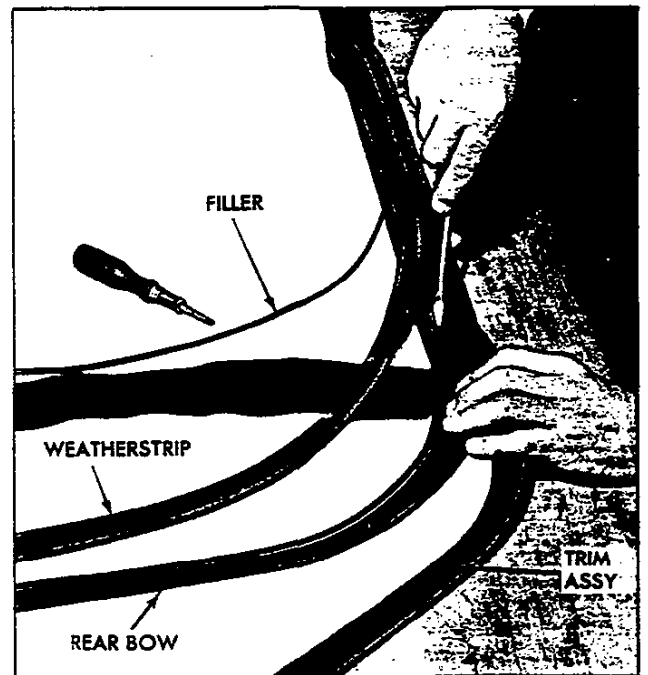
Installing Trim and Weatherstrip to Rear Bow
